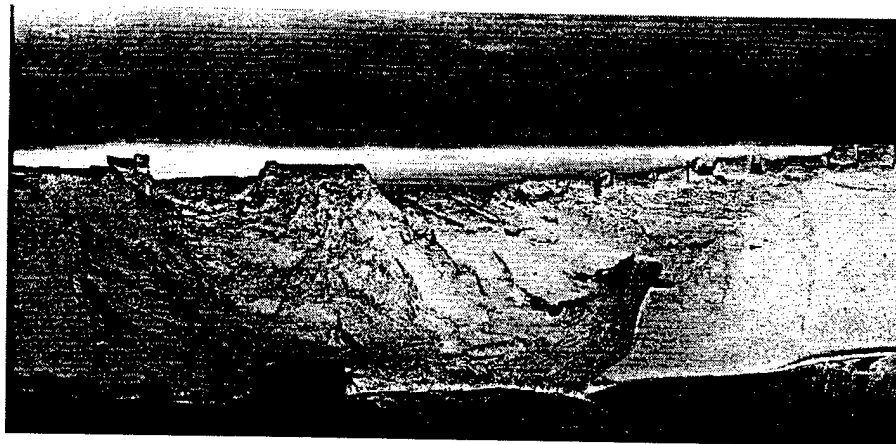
XM776 S/N 003 breech end fracture surface.
